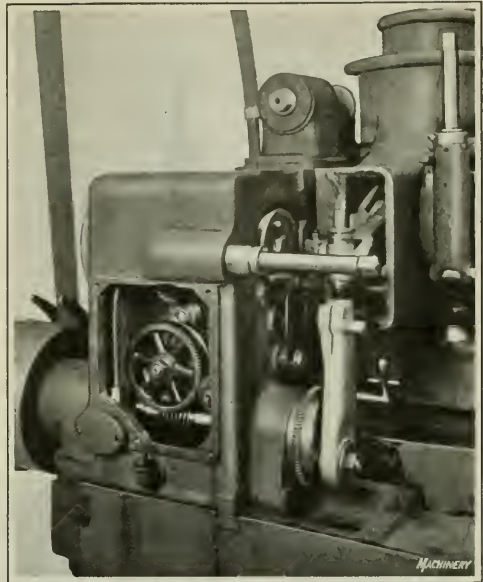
View taken from the Left-hand End of Machine, showing Feed-change Gears, Crankshaft, Connecting-rod, etc.
